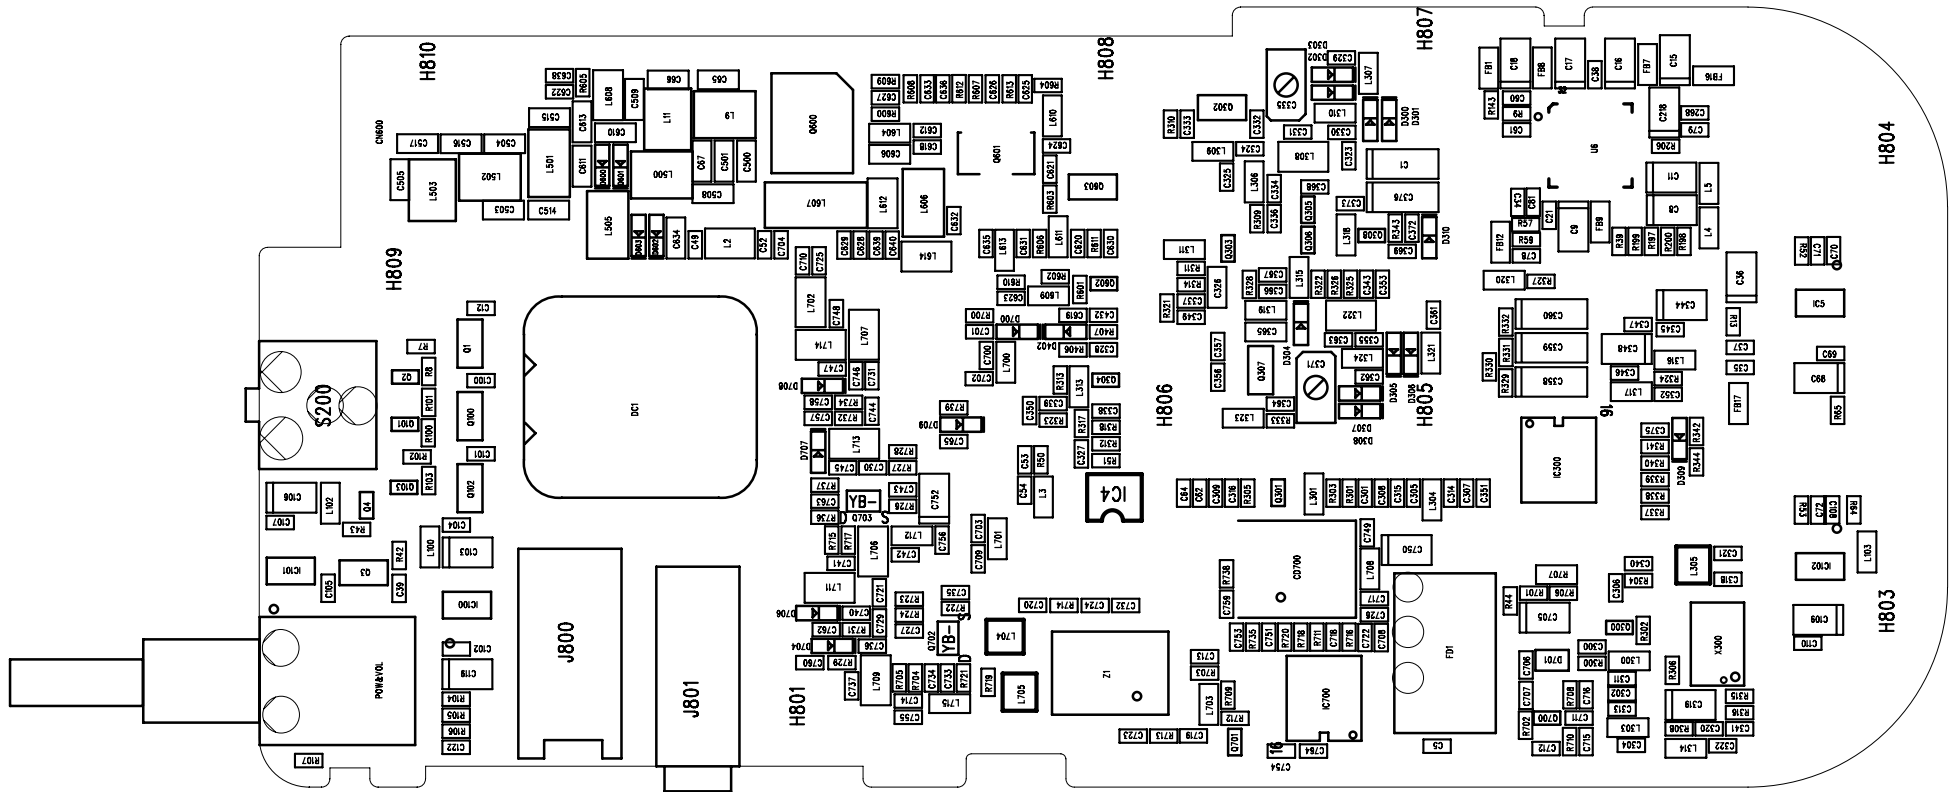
FP560-01 Bottom PCB Position Mark Diagram (136-174MHz)
